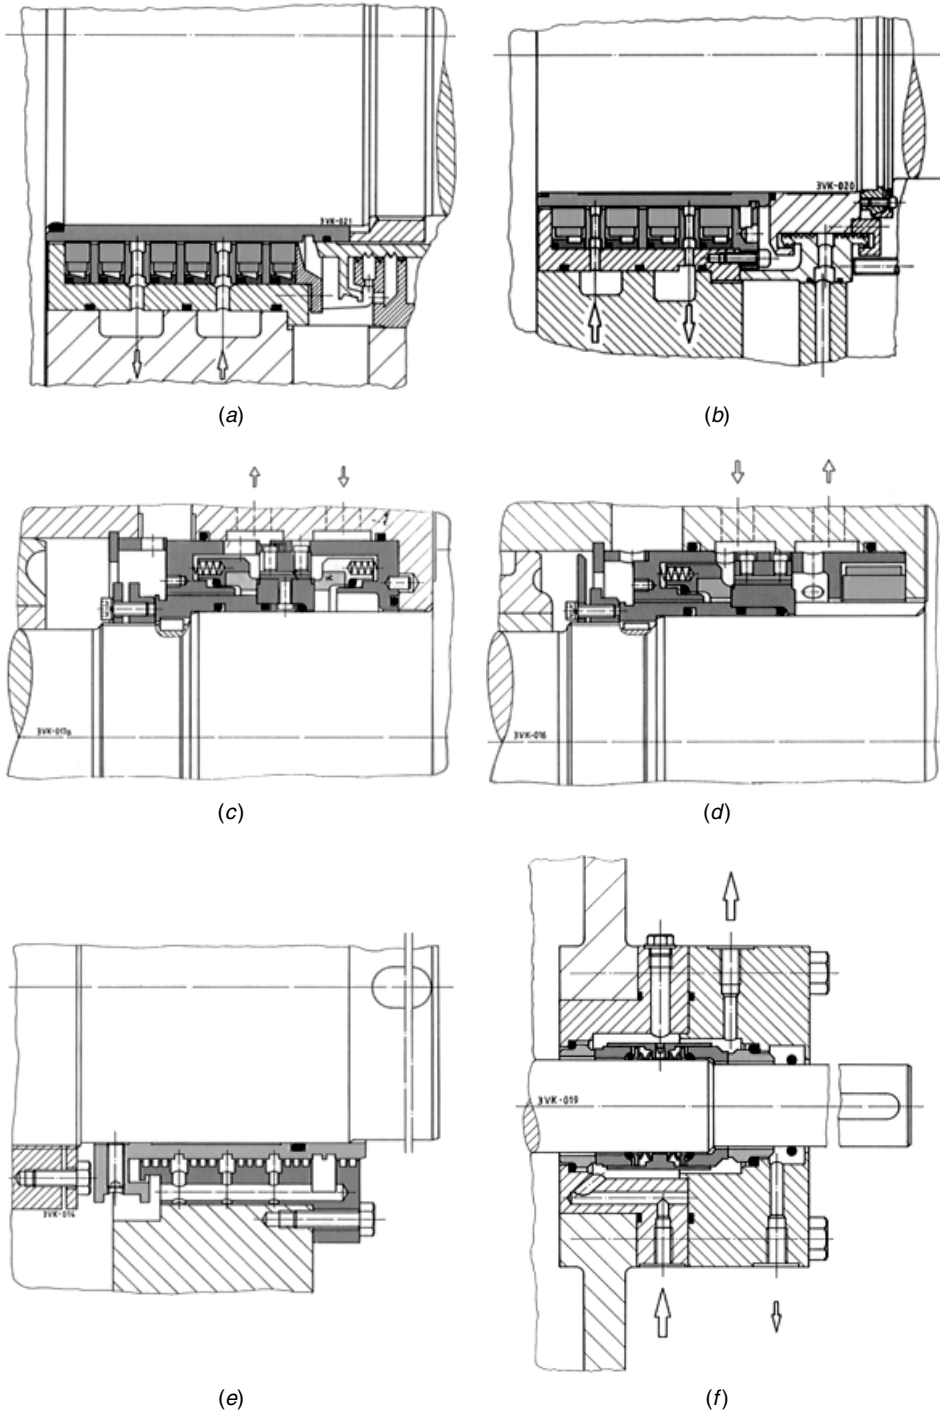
Sealing arrangements for rotary screw compressors. At the conveying chamber: (a) carbon labyrinth seal, (b) water-sealed floating rings, (c) double-acting slide ring seal, (d) combined floating ring and slide ring seal. At the drive shaft: (e) labyrinth seal, (f) double-acting slide ring seal. (Aerzen USA Company, Coatesville, Pa.)
